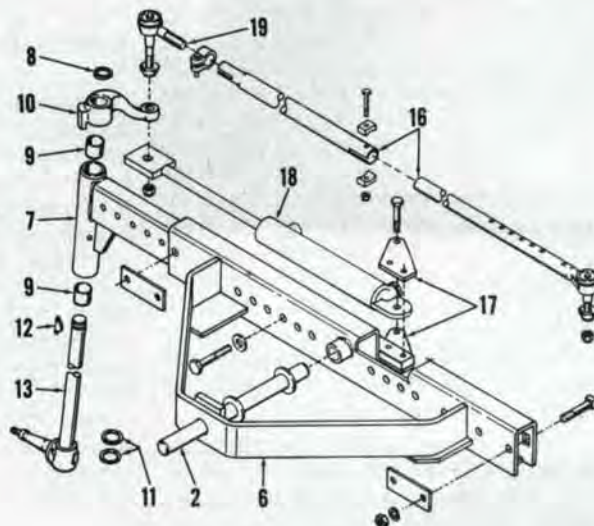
A—Exploded view of adjustable front axle assembly used on Model 7000. Refer to Fig. 5 for parts identification except for: 17. Cylinder brackets; 18. Power steering cylinder; 19. Tie rod end.
